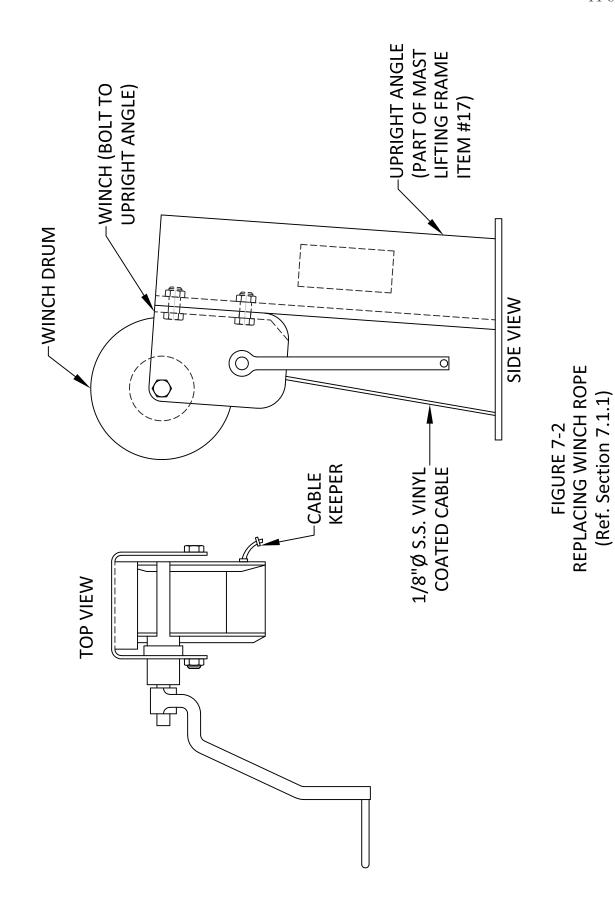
REPLACING WINCH ROPE (Ref. Section 7.1.1)
